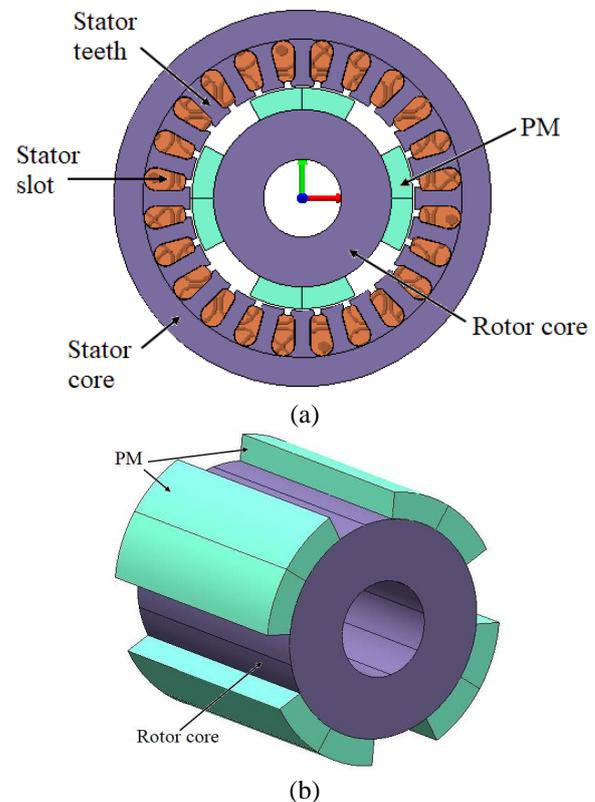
Reference radial flux PMLDC Motor (a) cross sectional view (b) 3-D view of rotor core
